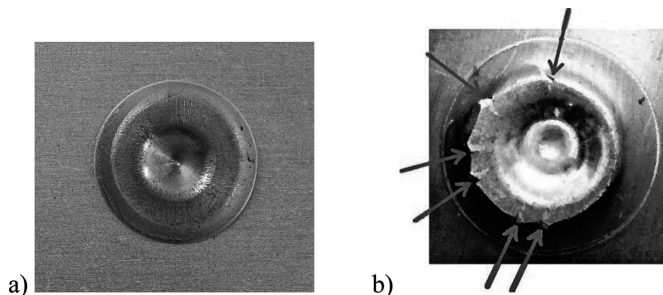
Rear specimen side view: a) properly created joint (aluminum 5005), b) cracks on (aluminum 2024)
